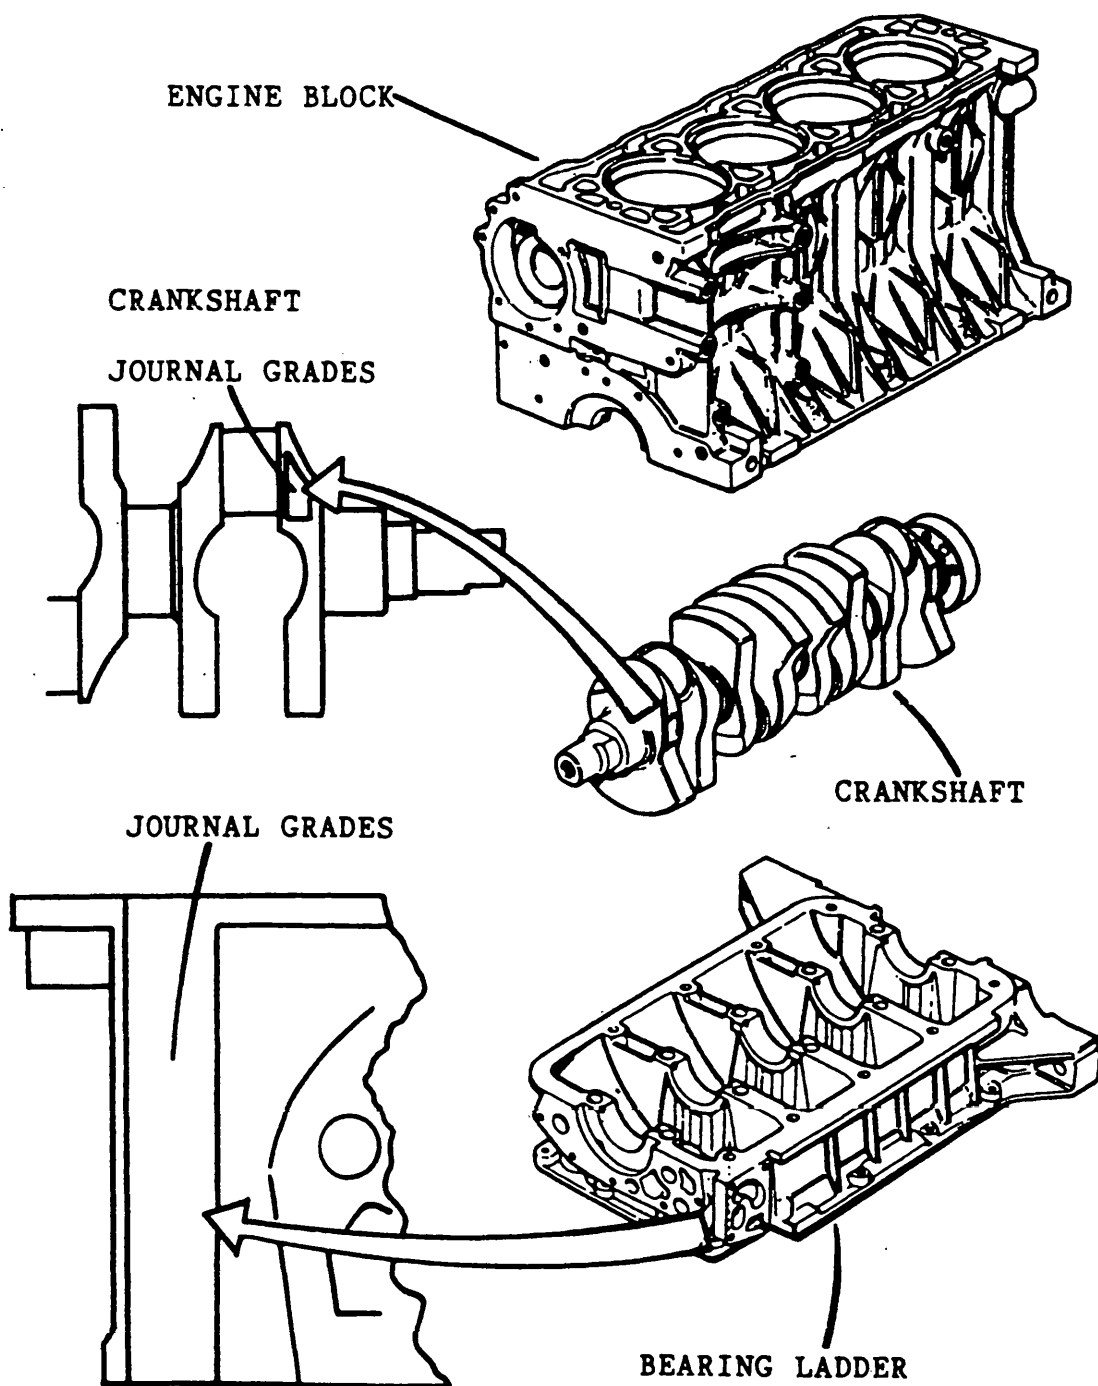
Bearing Grade Codes Marked on Engine Components
